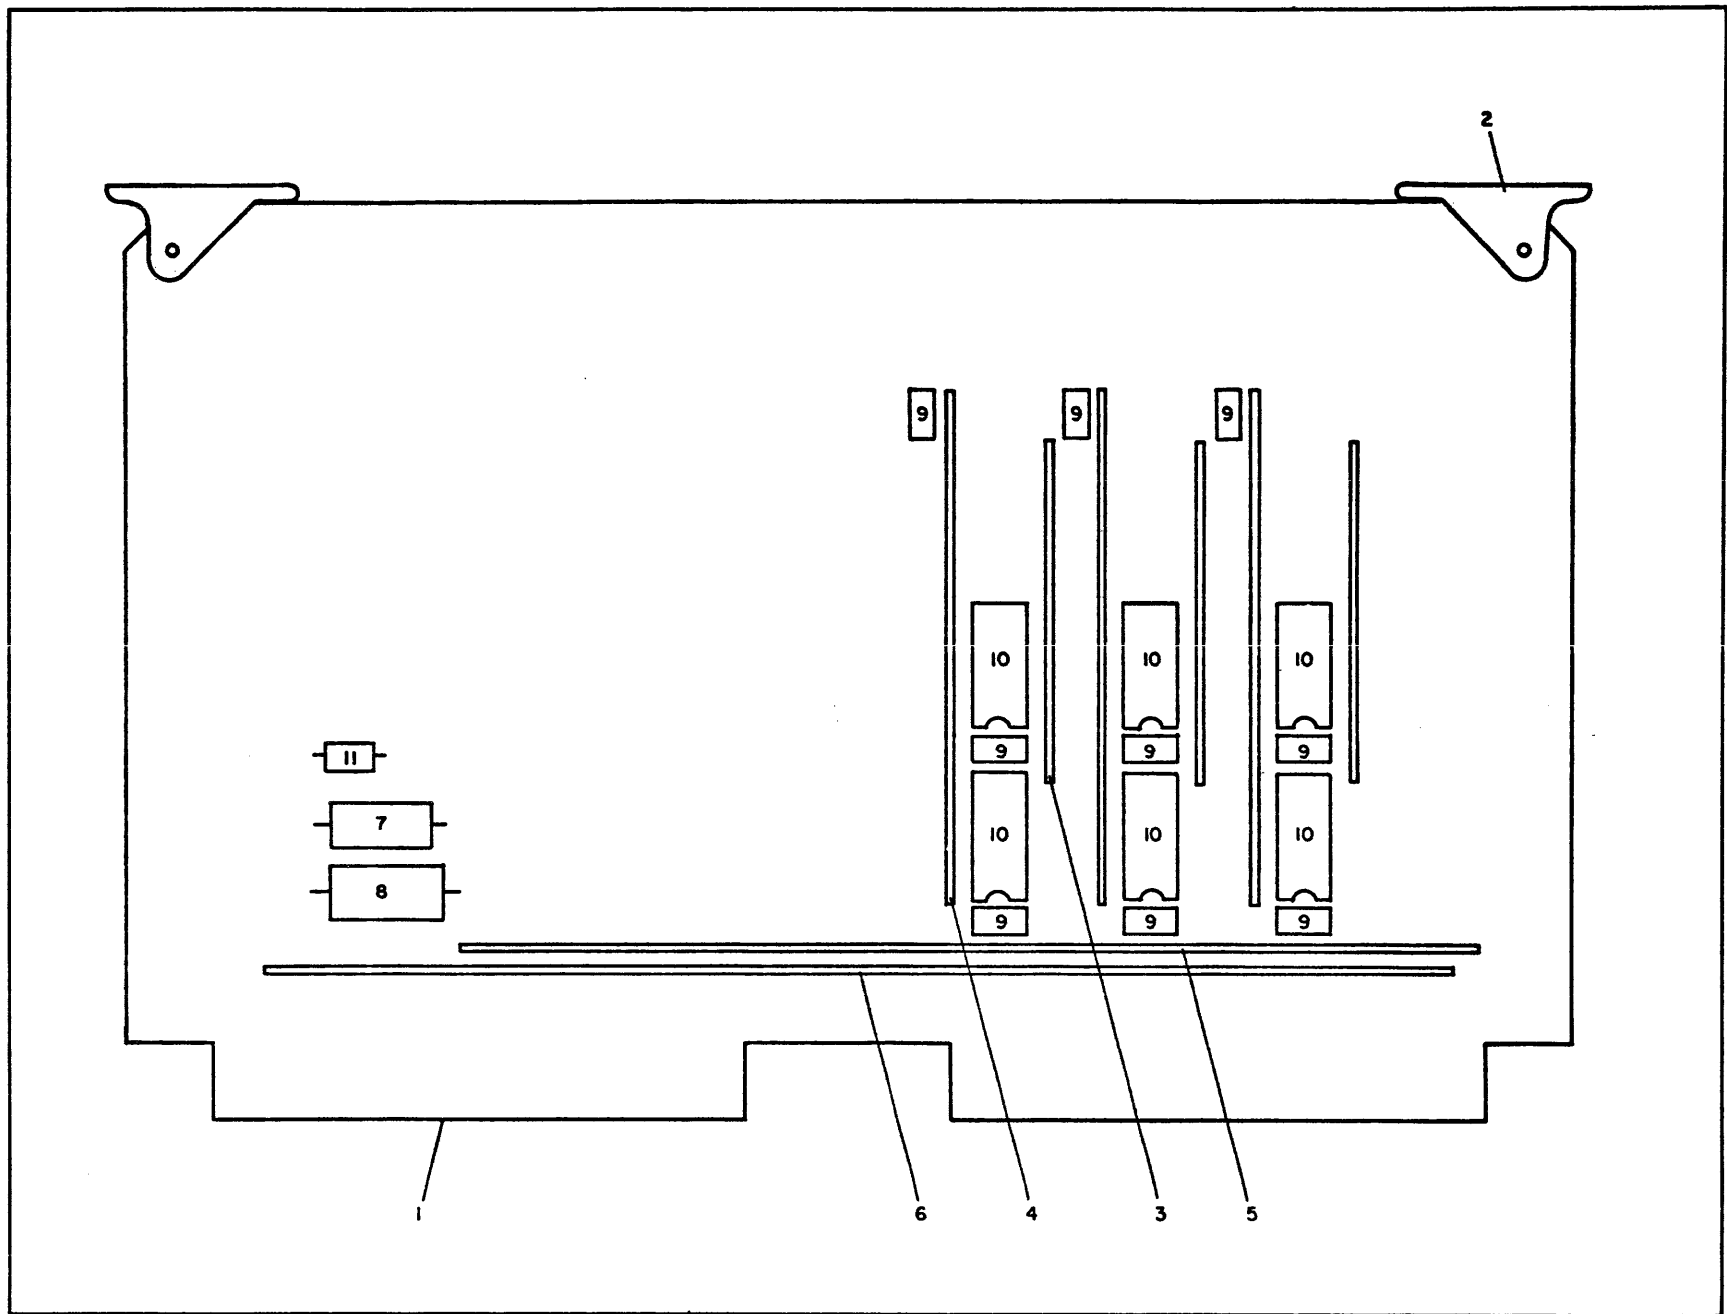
PC ASSEMBLY - DRIVER CARD
